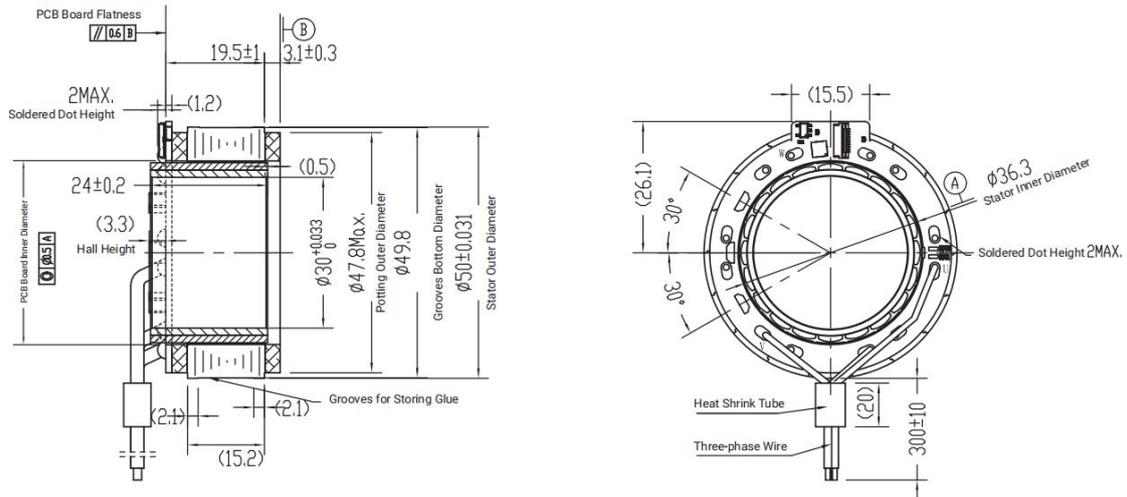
RMD-FL-50-15-200 appearance dimension drawing
